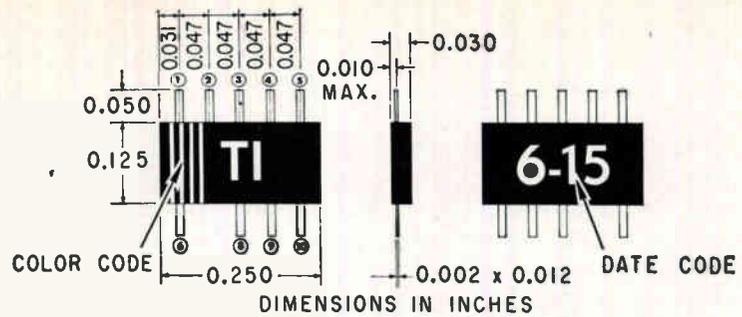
Outline dimensions of hermetically sealed Solid Circuit network package after attaching cover to header
